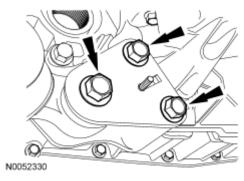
Locating Roll Restrictor-To-Transaxle Bracket Plate Bolts Courtesy of FORD MOTOR CO.
